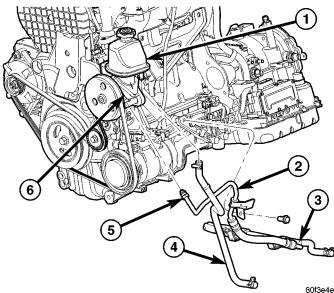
Hoses At Pump And Engine - 2.4L Turbo
